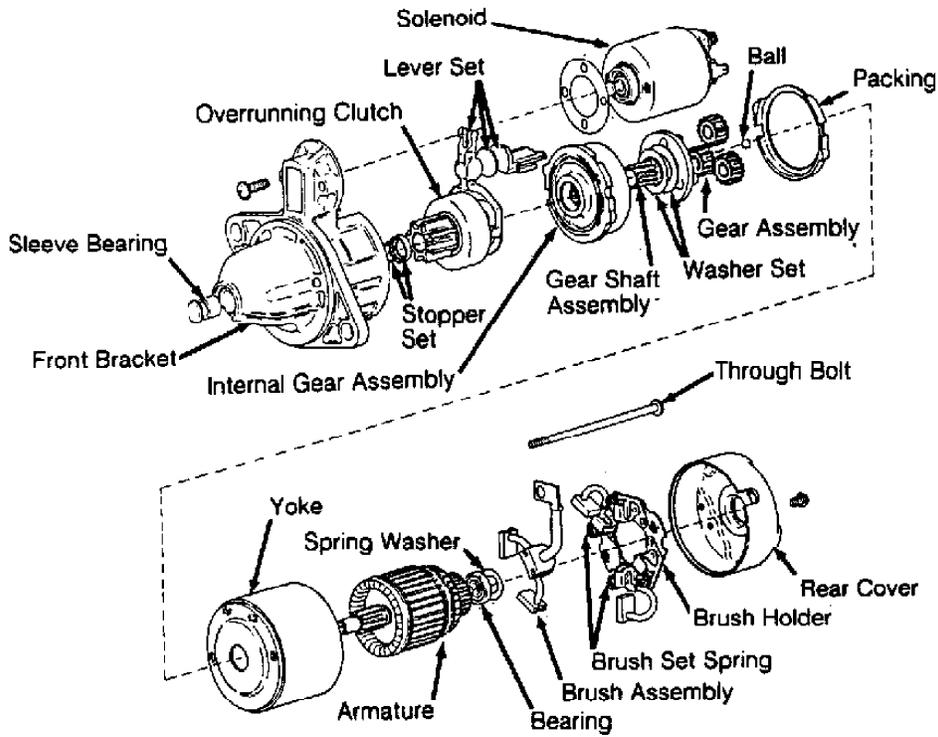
View of Mitsubishi Reduction Gear Starter (XT & XT6)
